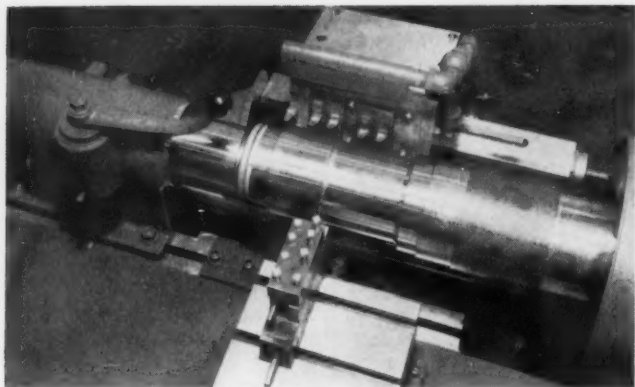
Four successively-fed cutting tools on this Gisholt No. 12 hydraulic automatic lathe machine a deep contour in a heavy cylinder in a single pass.
